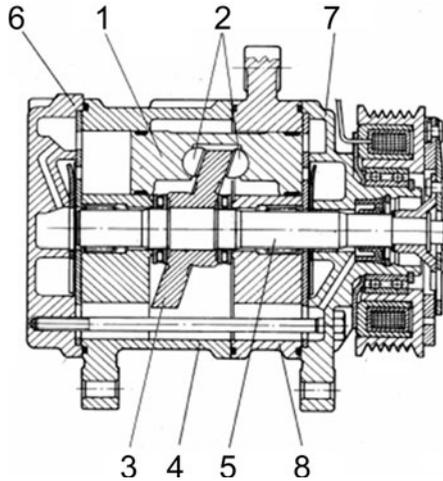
Reciprocating axial compressor with fixed displacement (swash plate), double effect pistons. Components: 1 double acting pistons, 2 slide, 3 inclined plate, 4 rear body cylinders, 5 shaft, 6 rear cap, 7 front cap, 8 front body cylinders.
